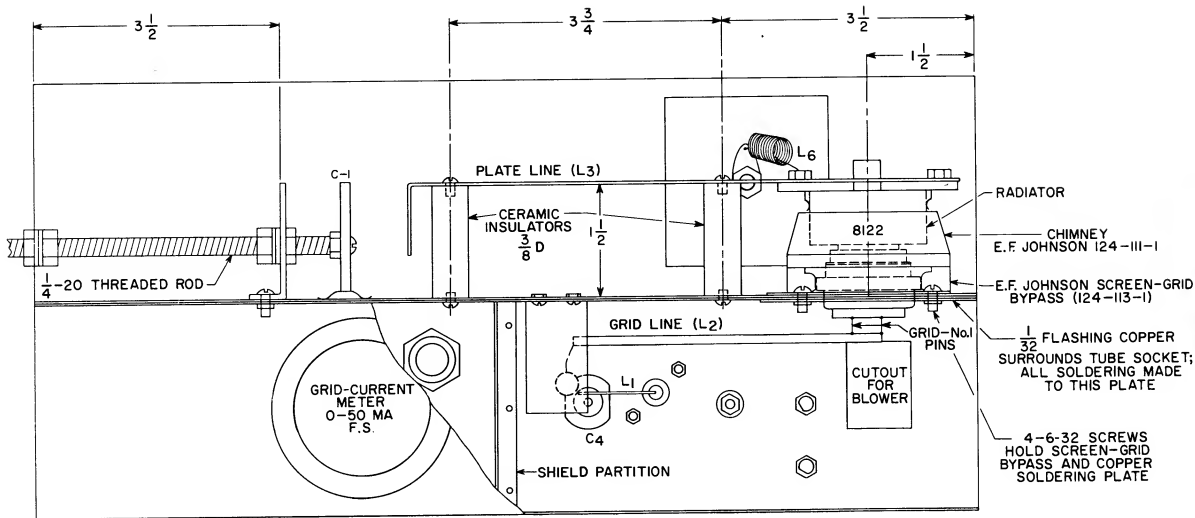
Cutaway view of plate-line and grid-line assembly (all dimensions in inches).
